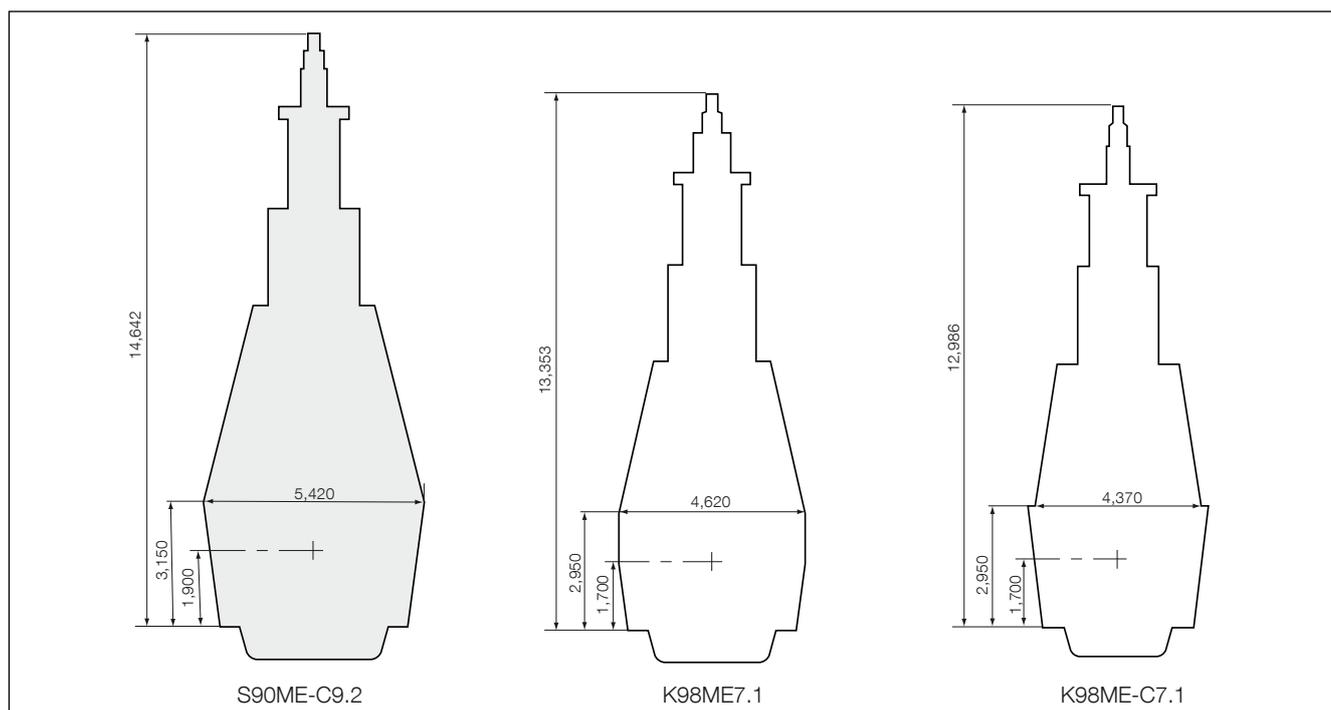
Main dimensions for an S90ME-C9.2 engine and for other existing container ship engines
